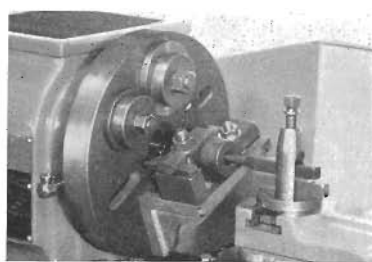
Machining a Bearing Housing mounted on an Angle Bracket attached to the Lathe Faceplate
